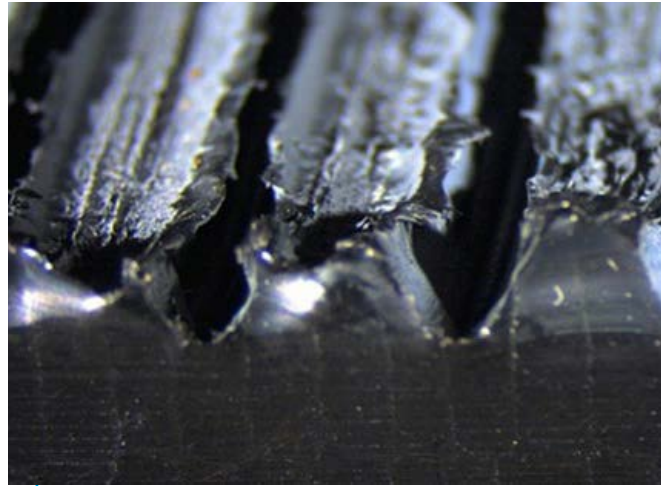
shows the side view of ductile fracture with tearing of the PE occurring between the windings of the heating wire. The wires are no longer encapsulated in the PE and have been dislodged. Ductile tearing is present in the fracture zone.
